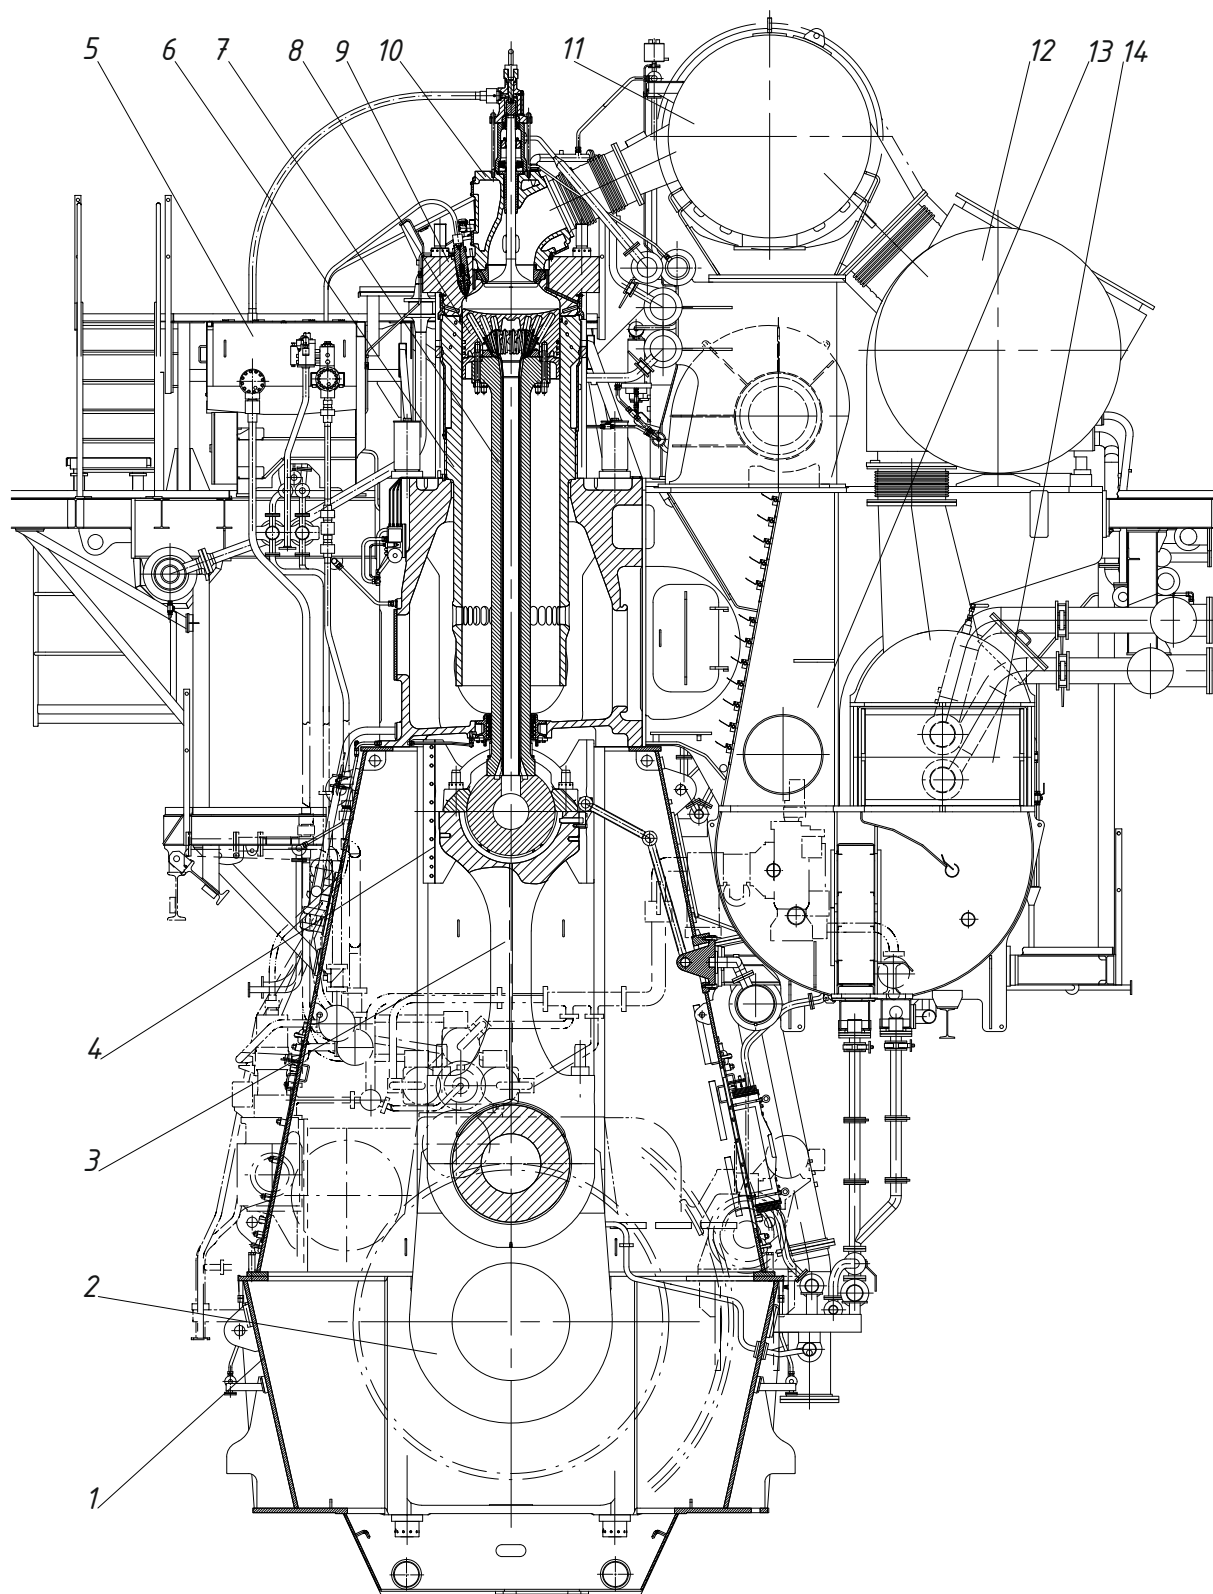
General structure of the RT-flex 82C two-stroke crosshead diesel engine: 1 – frame; 2 – crankshaft; 3 – connecting rod; 4 – crosshead; 5 – fuel supply and gas distribution control unit; 6 – cylinder sleeve; 7 – piston rod; 8 – piston; 9 – cylinder cover; 10 – exhaust valve actuator; 11 – exhaust receiver; 12 – turbocharger; 13 – intake receiver; 14 – charge air cooler (adapted from [1])
